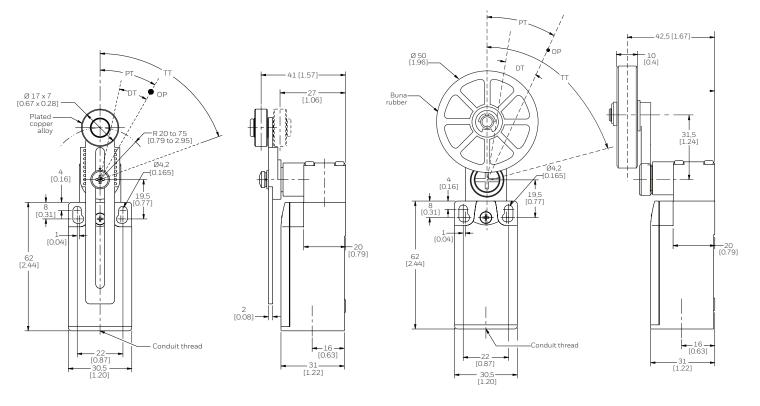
GLL Side Rotary (A2Y) with Adj. Roller Lever Dimensions
